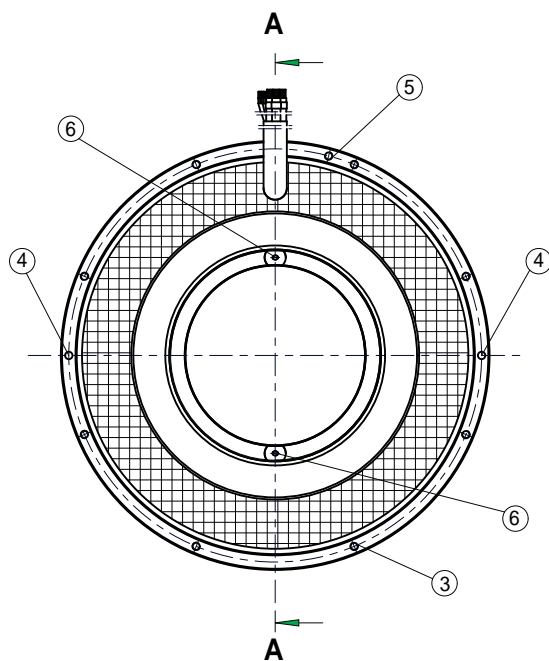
1MB 375 frameless spindle motor - dimensional data (part 1)
